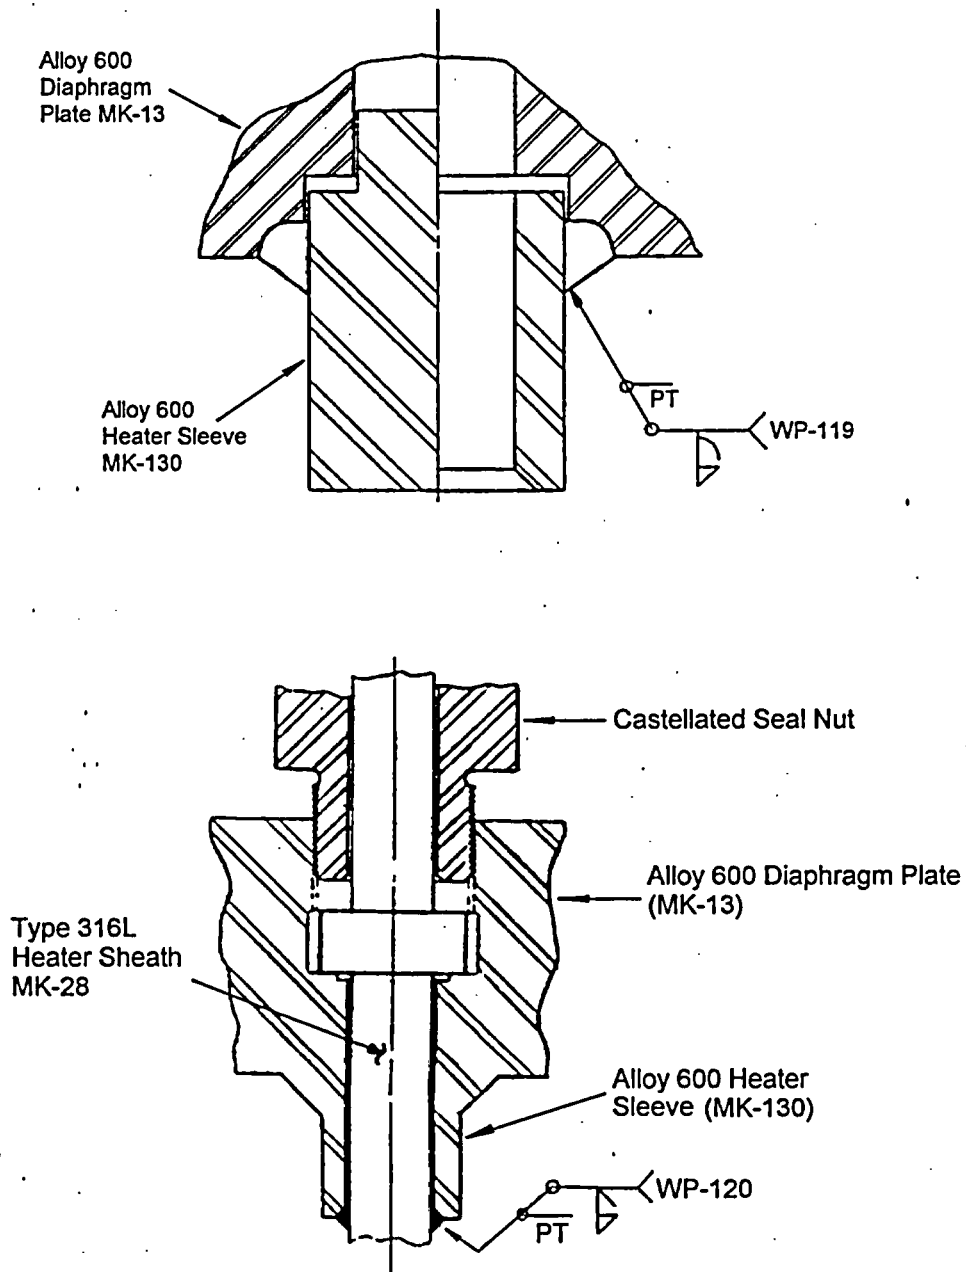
Top, detail of the Alloy 600 heater sleeve to the Alloy 600 diaphragm plate weld
